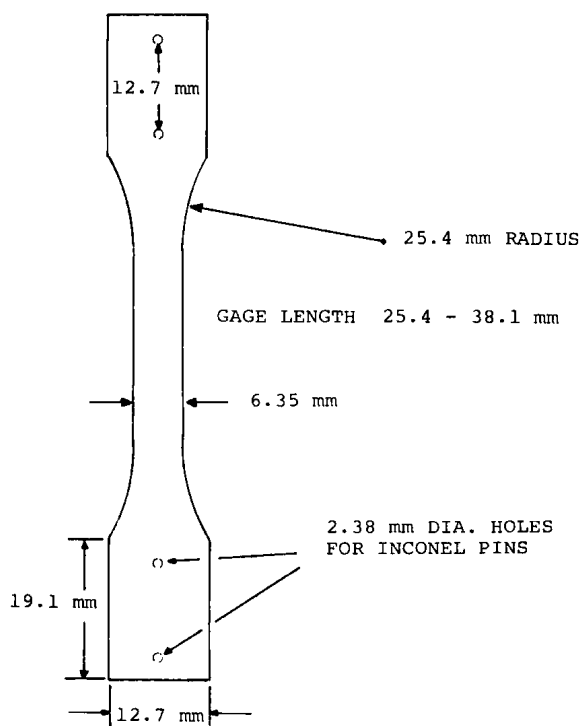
Width-tapered specimen geometry (shoulder radius 13 or 25 mm).
